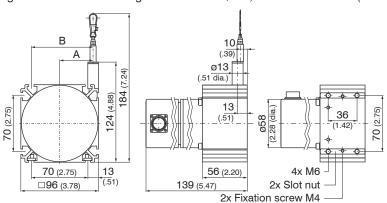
Dimensional drawing ... - FD96 - SSI, dimensions in mm (inches), not to scale
